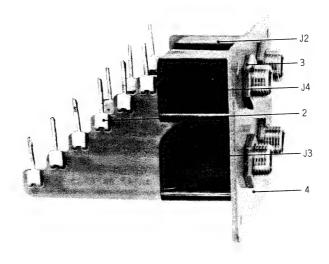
PHOTO OF REMOTE P.C. BOARD (96-5003) BLOCK
